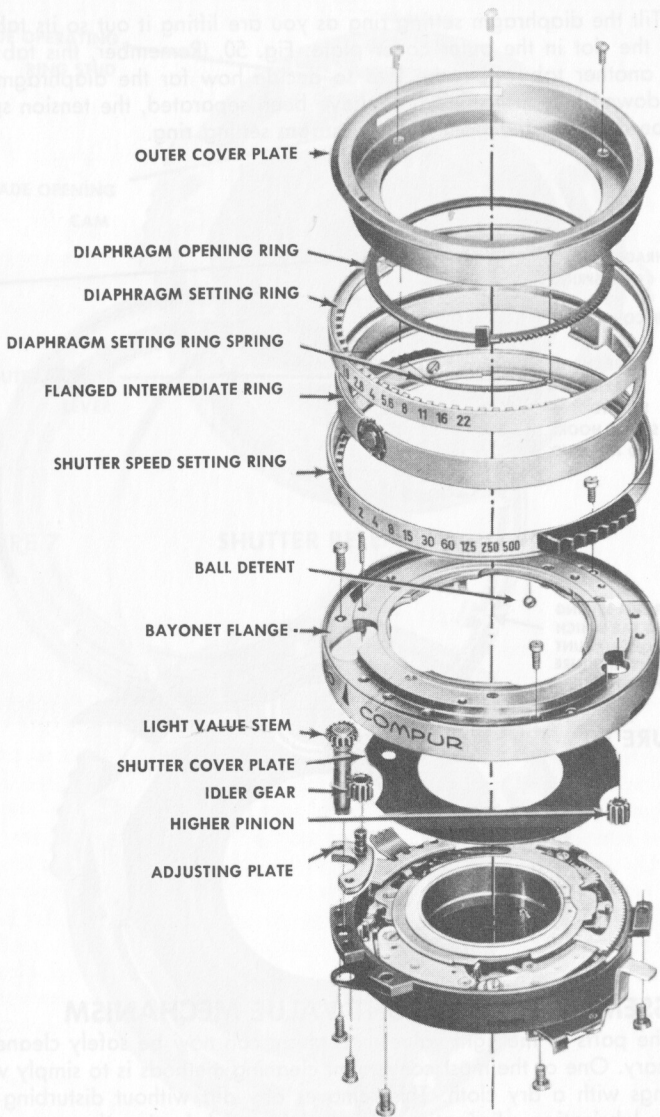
EXPLODED VIEW OF LIGHT VALUE MECHANISM
